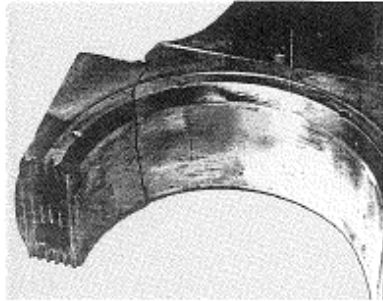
Crack propagation at the journal end of a connecting rod; traces of fretting corrosion at the bore surface.
